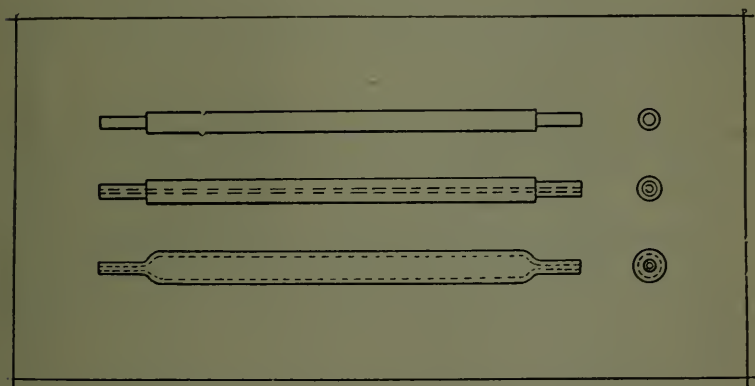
Evolution of the modern stern-wheel-steamer shaft.
